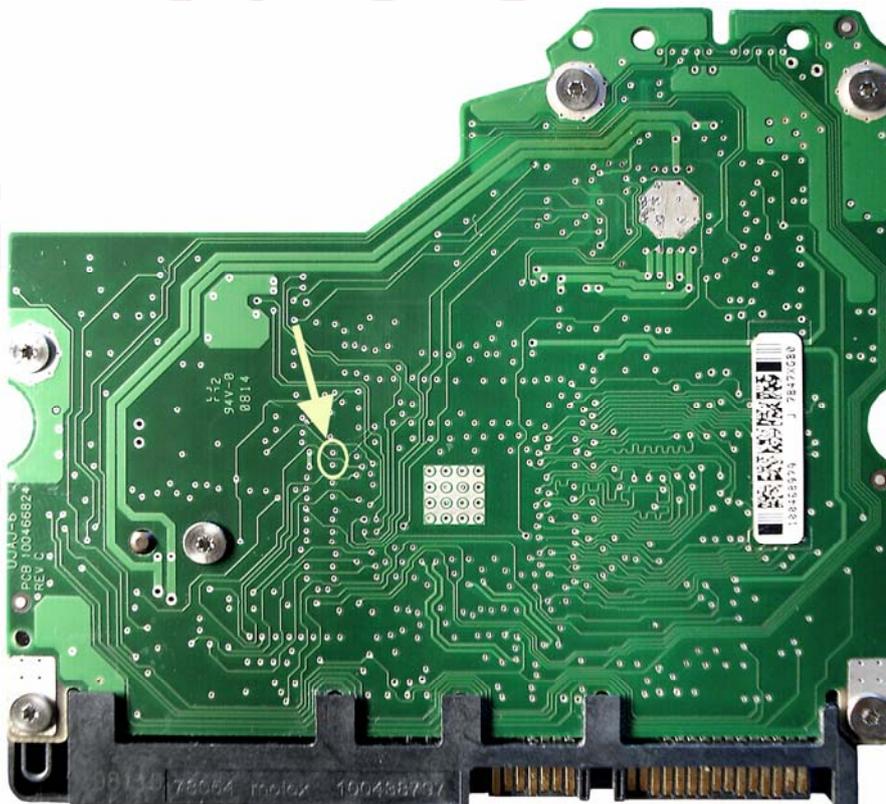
Board view from the external side. Connection points are marked in yellow.
